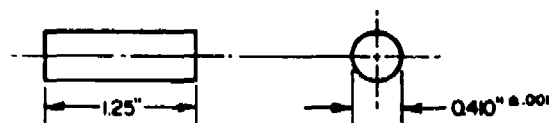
Subsize compression specimen (short transverse for 2-inch-diameter) for Inconel 718 and Inconel 625 bars. Drawing 4Co.
